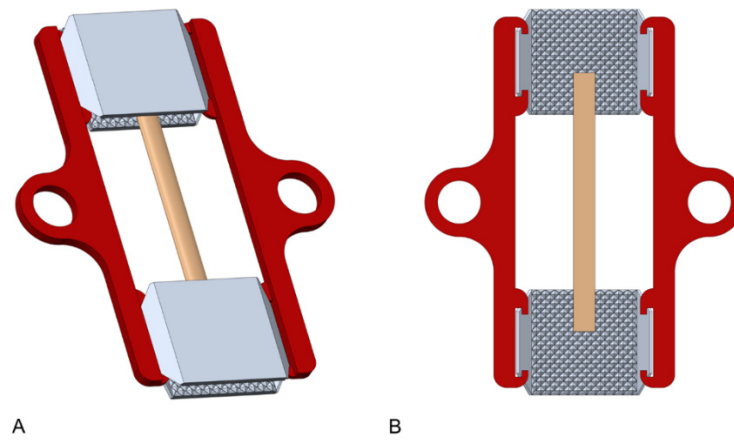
Computer-aided design model of the assembled clamps and holder arms (including the schematic representation of a sample). (A) 3D view, (B) cross-sectional view.
